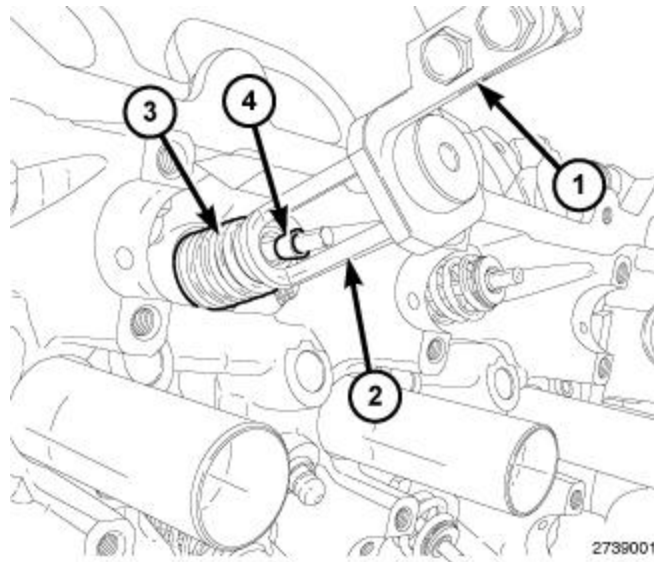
Compressing Valve Spring & Locating Valve Retaining Locks
